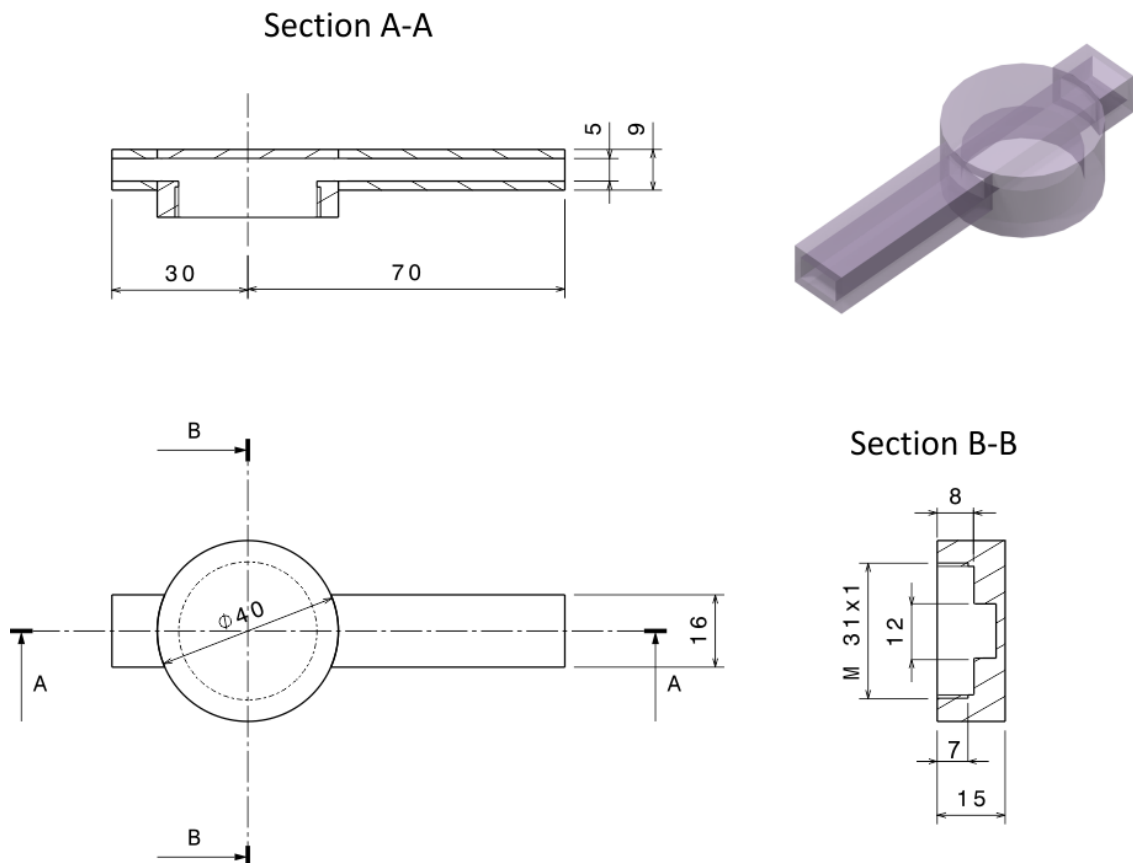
Mechanical drawing and 3D model of the flow chamber.
